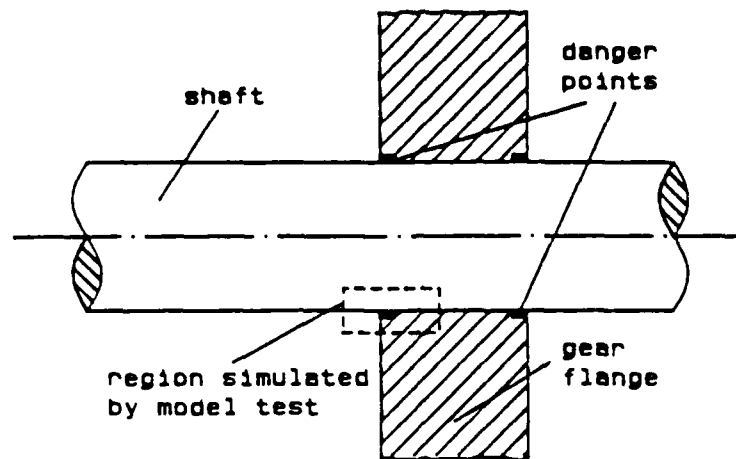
Schematic diagram of a wheel-on-axle assembly illustrating the position of frequently observed fretting damage.
